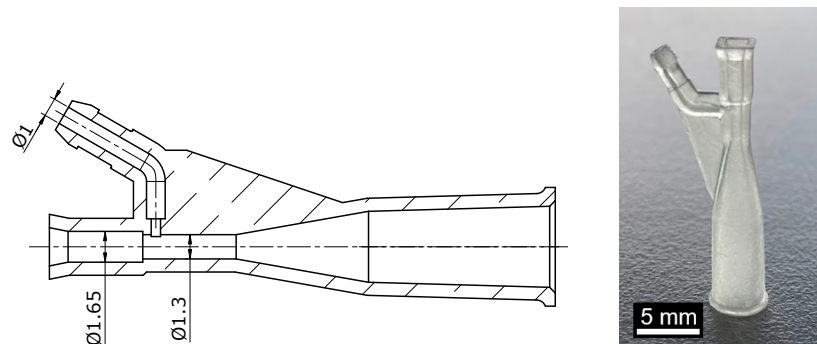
One of the couplers. The opening of the static pressure port in the manufactured part is barely visible to the naked eye. A section view presents the internal channels. The conic section is used to fit the coupler to the flexible pipe.
